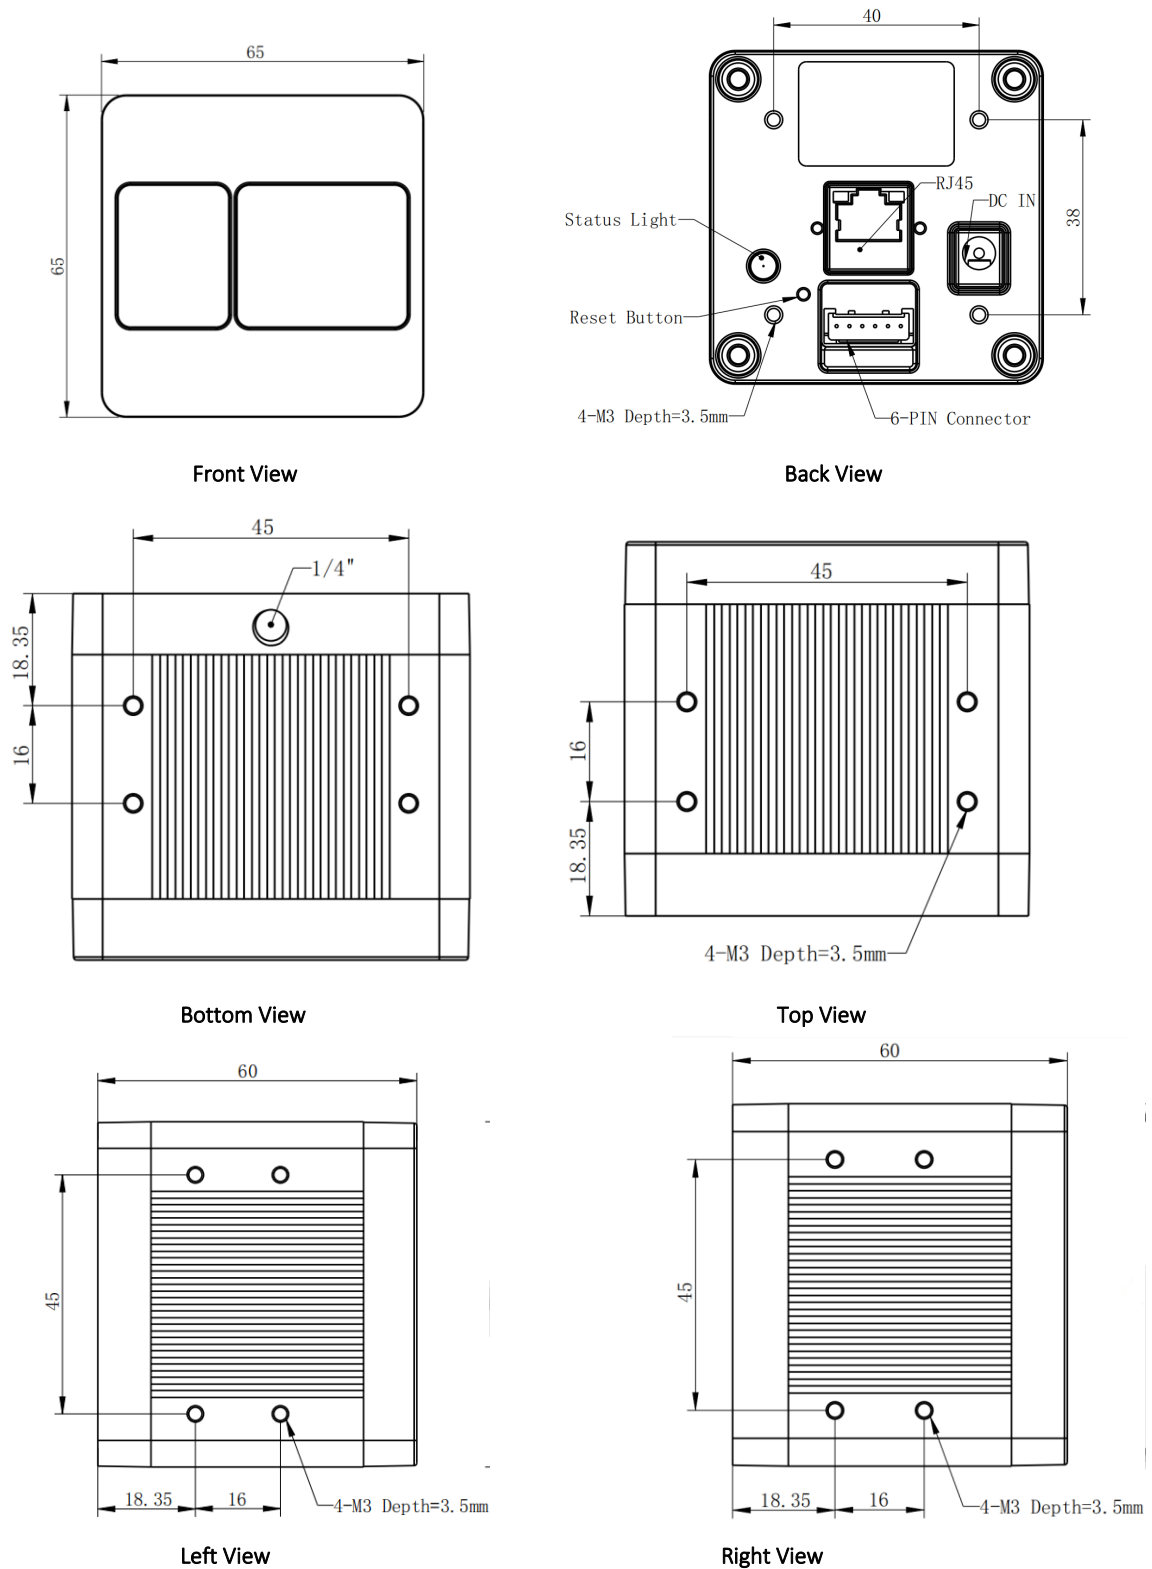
ToF Camera Dimensions:(Unit:mm)
